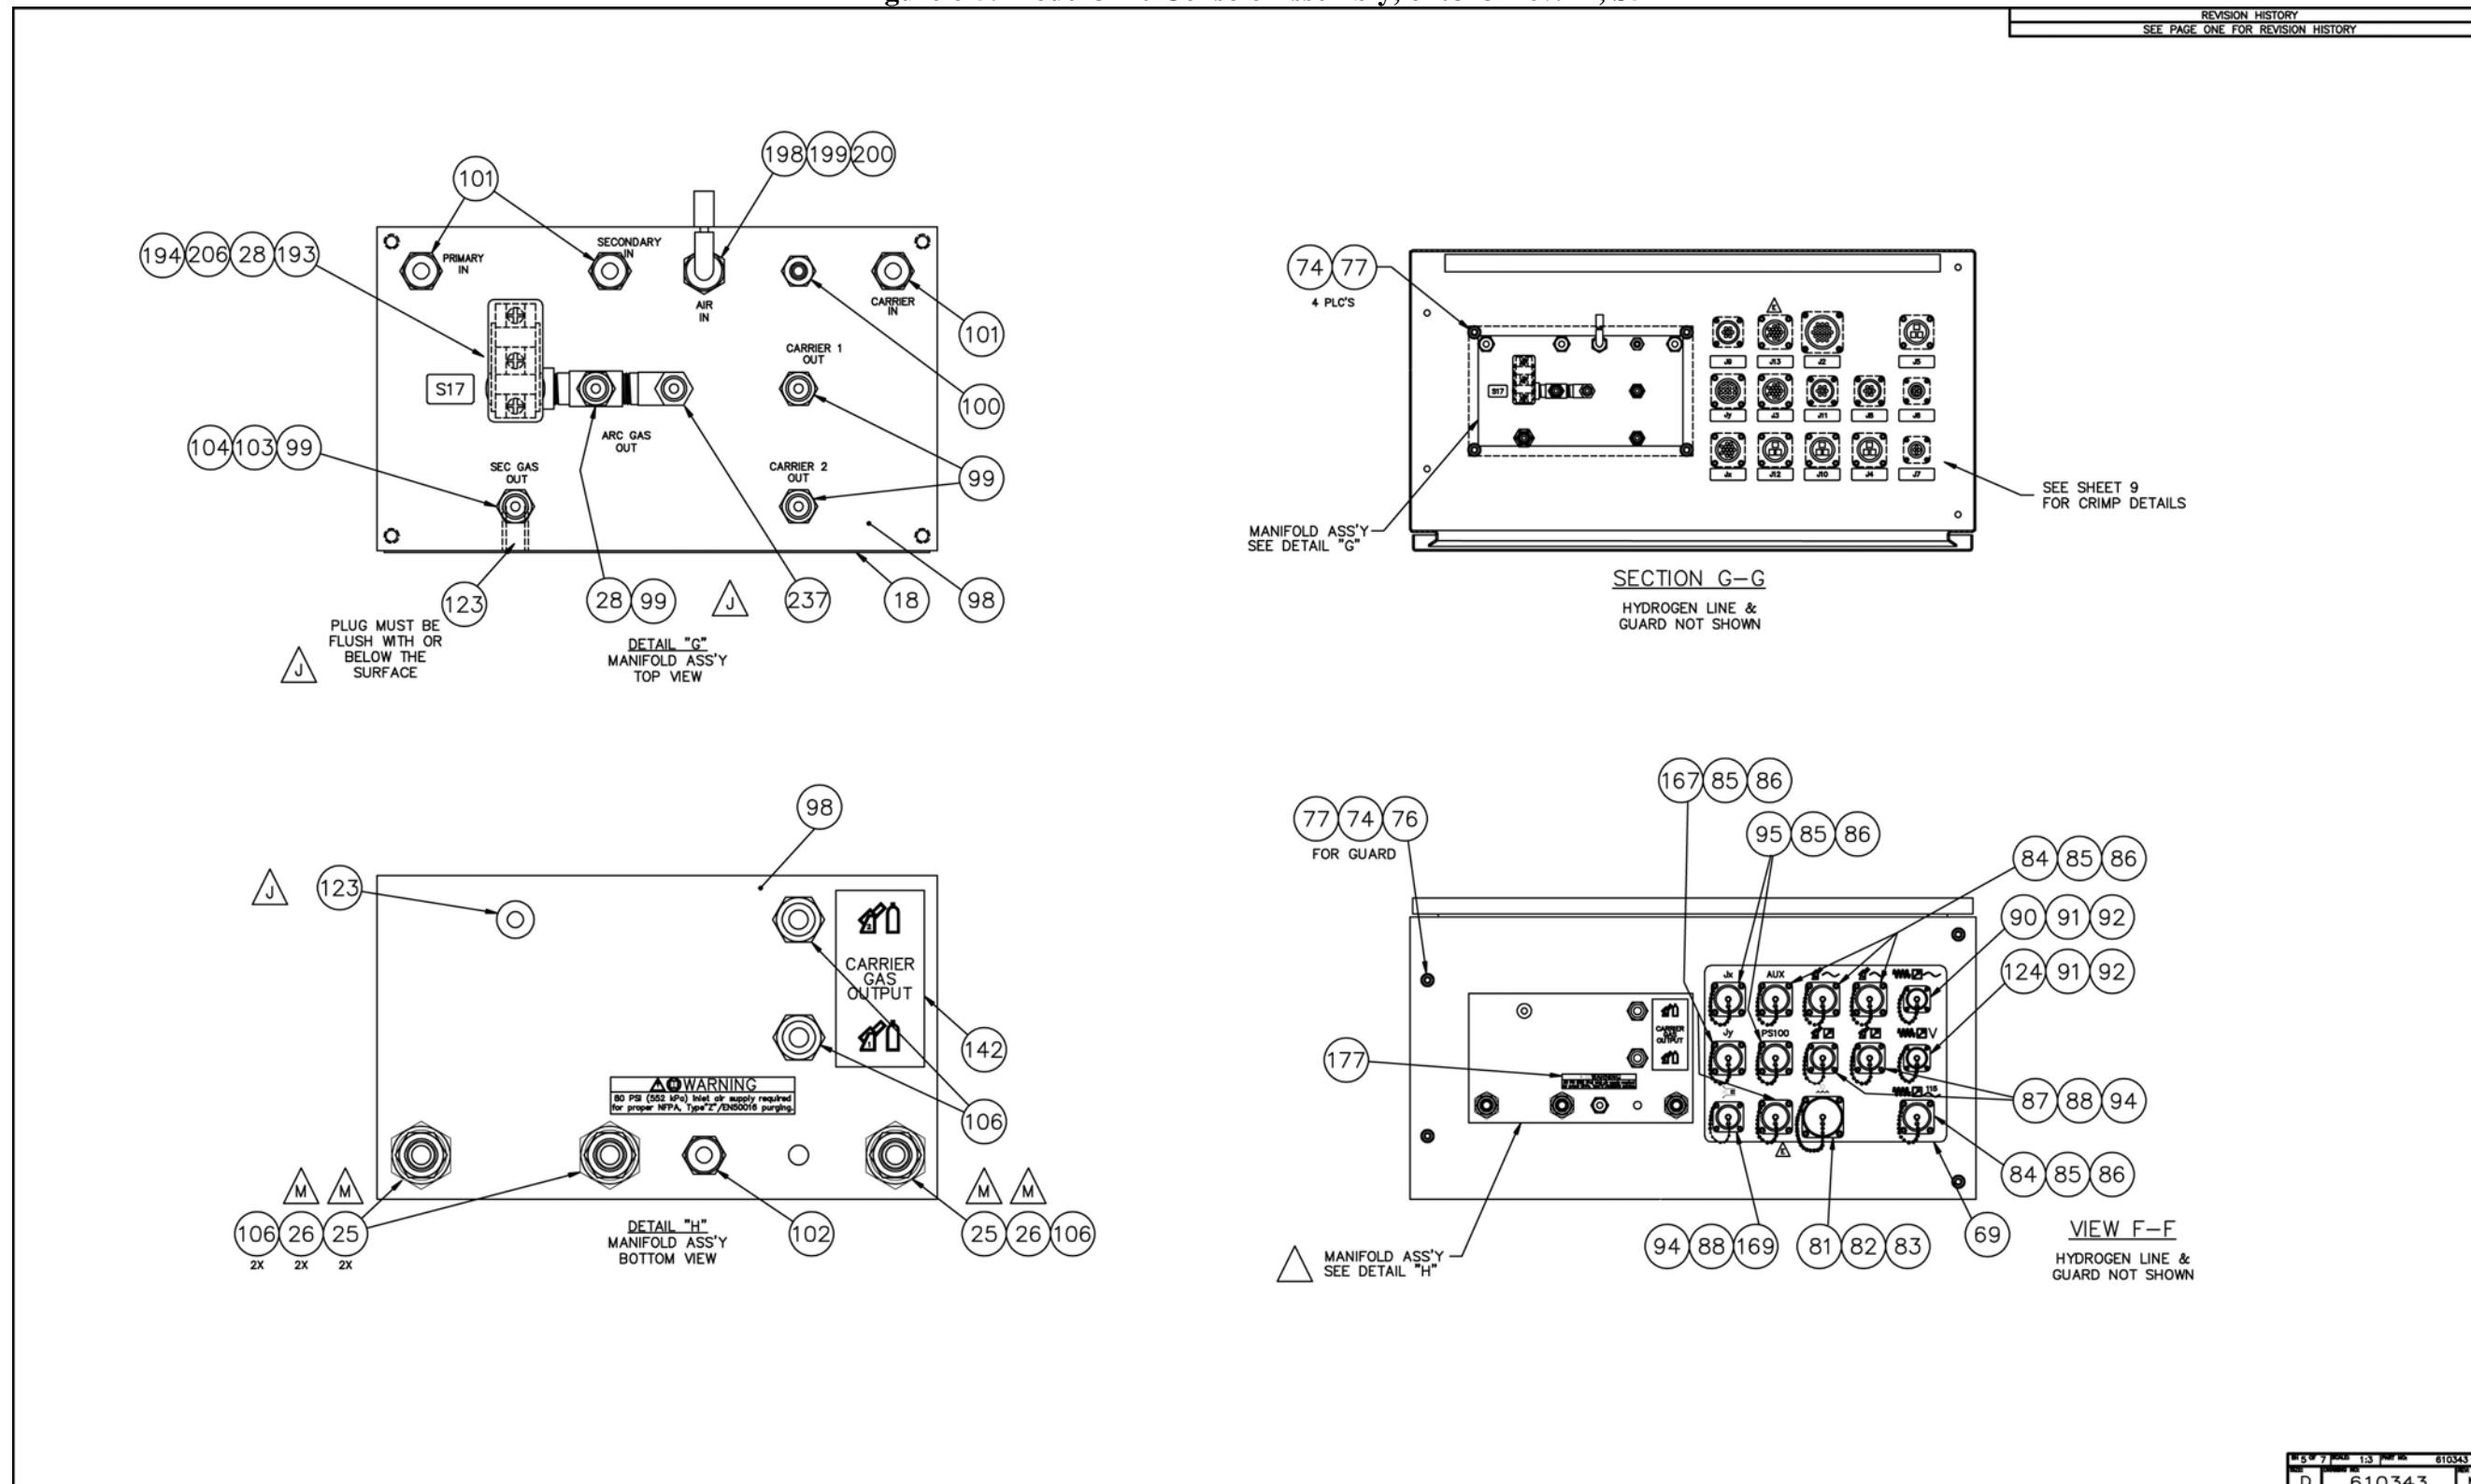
Model 3710 Console Assembly, 610343 Rev. M, S6
